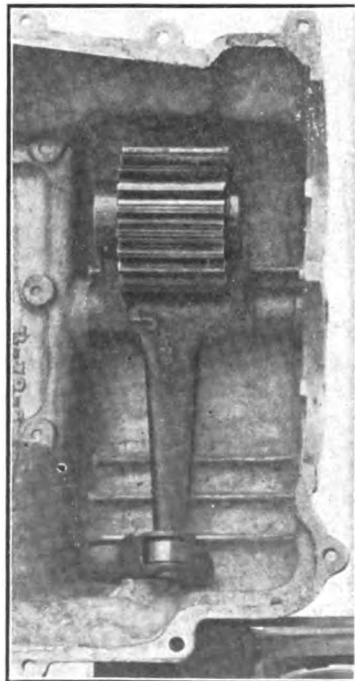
Detail of reverse mechanism which lays in lower half of gear-case and is operated by a sliding cam engaging a roller on end of lever
